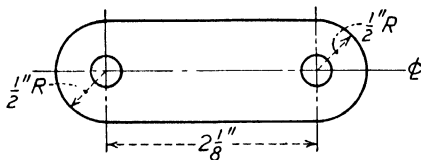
Washer plate with 2 holes drilled $\frac{5}{16}$ in. in diameter.
